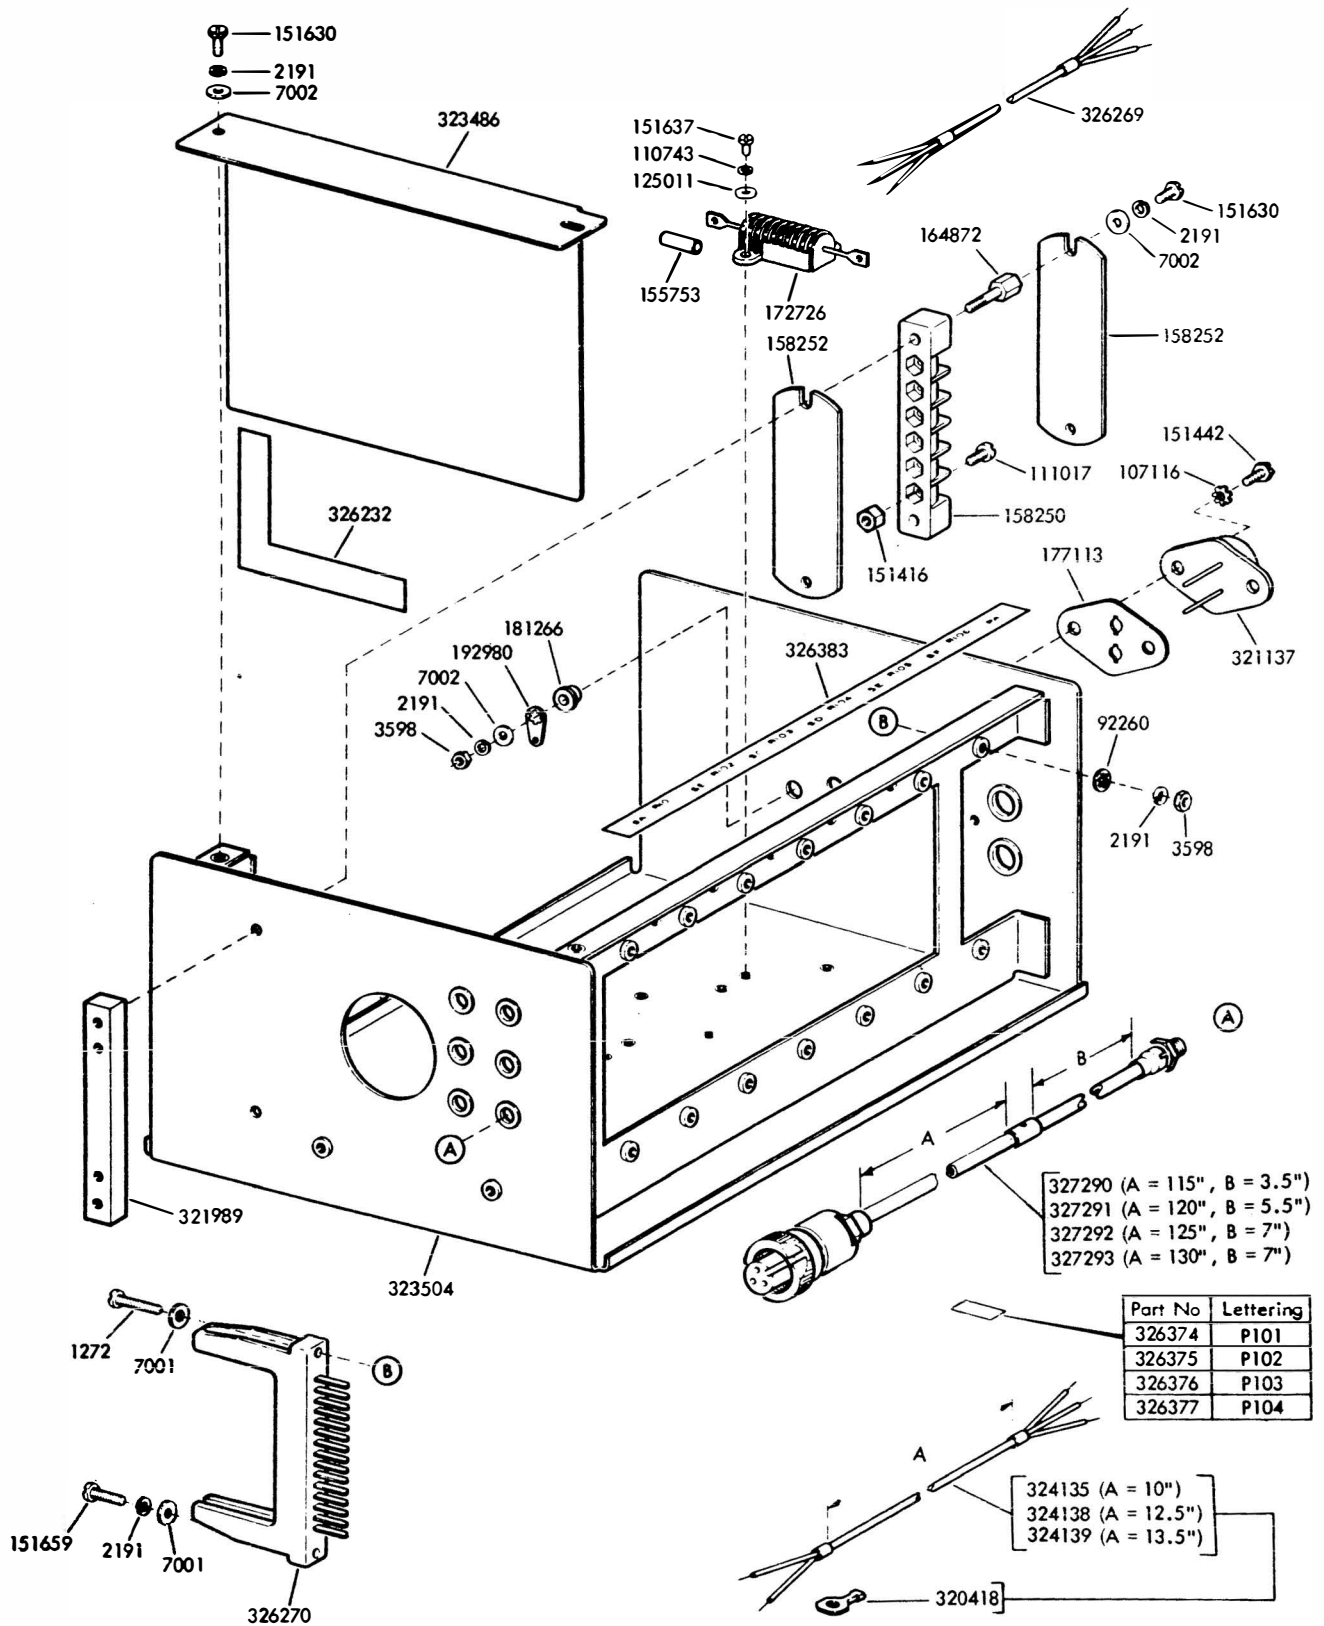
321228 ELECTRICAL SERVICE ASSEMBLY (Continued)
